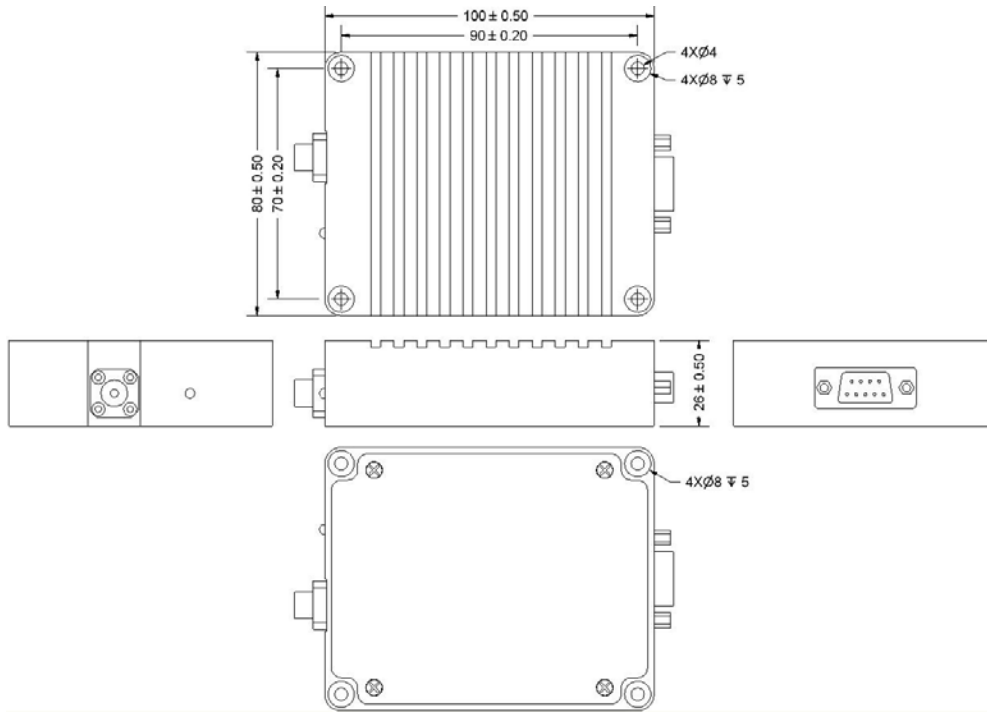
Mechanical drawing of module box (FC/APC connector with FC adaptor)
